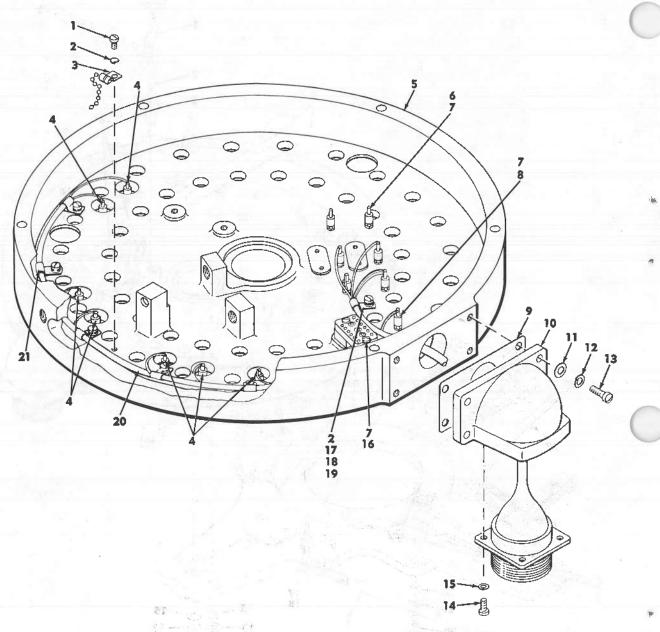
TRANSMITTER, COURSE DATA SUBASSEMBLY /9006523/-PARTIAL EXPLODED VIEW
